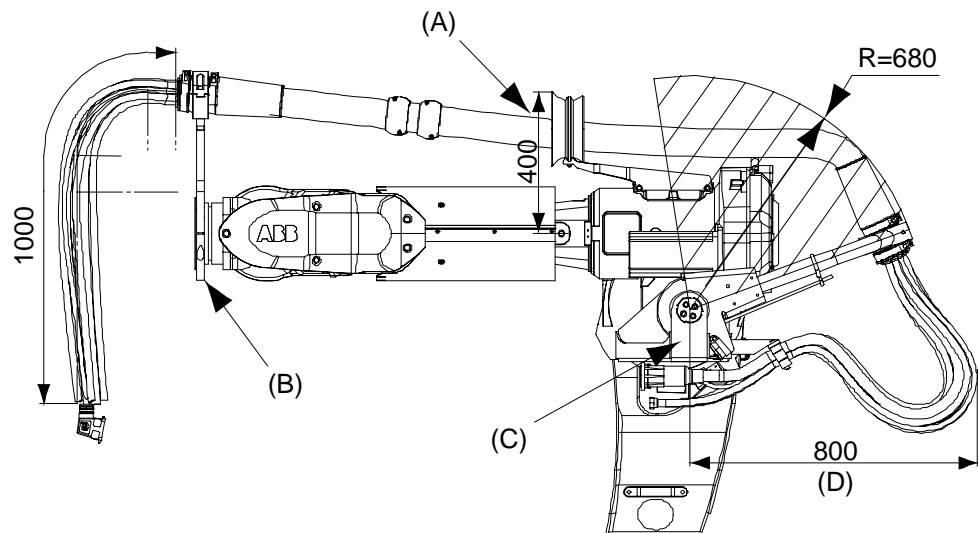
DressPack Upper arm side view Spot Welding version (dimensions in mm).
